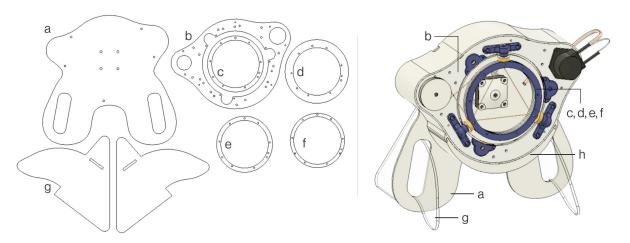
CAD model of Bubble Talk machine and drawings for laser cutting. (a) Back plate (b) Front plate (d), (e), (f) Iris rings (g) Support jigs (h) Soap liquid container
